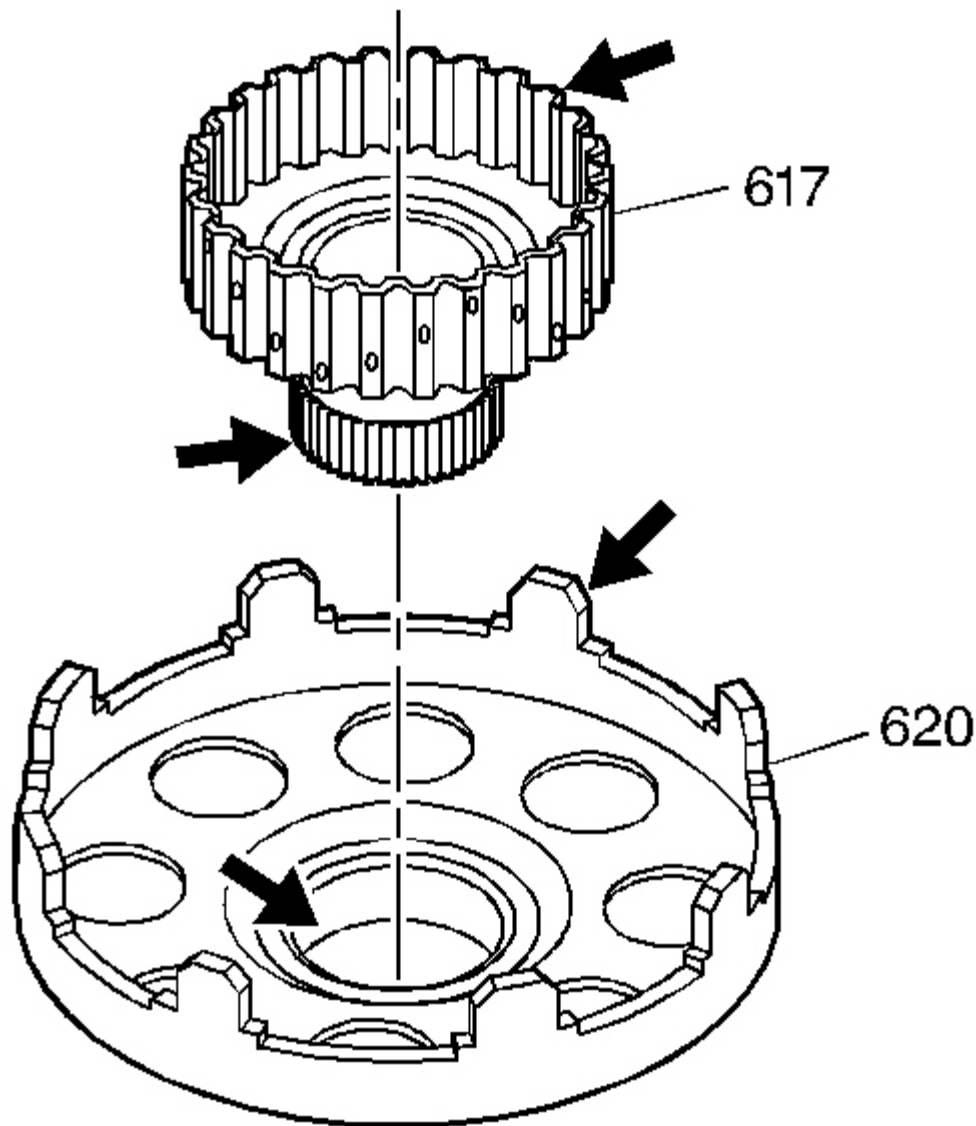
Locating Reaction Sun Gear And Shell Assembly
